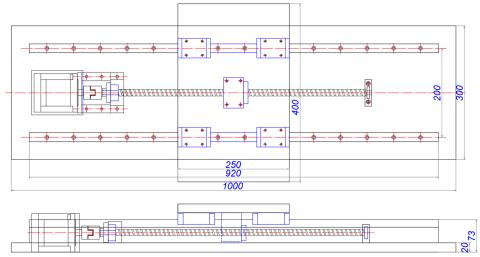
Diagram drive system of spindle of machine (moving in y horizontal direction)
